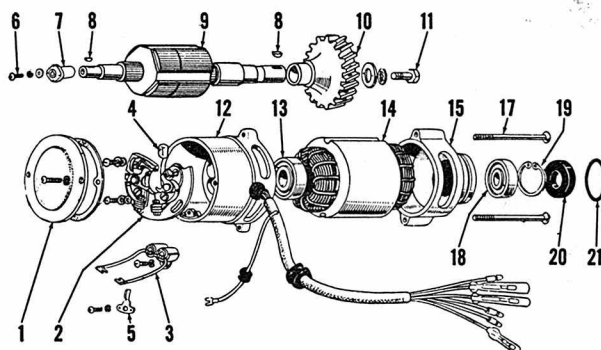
Exploded view of EN09 type alternator. Others are similar in construction.
